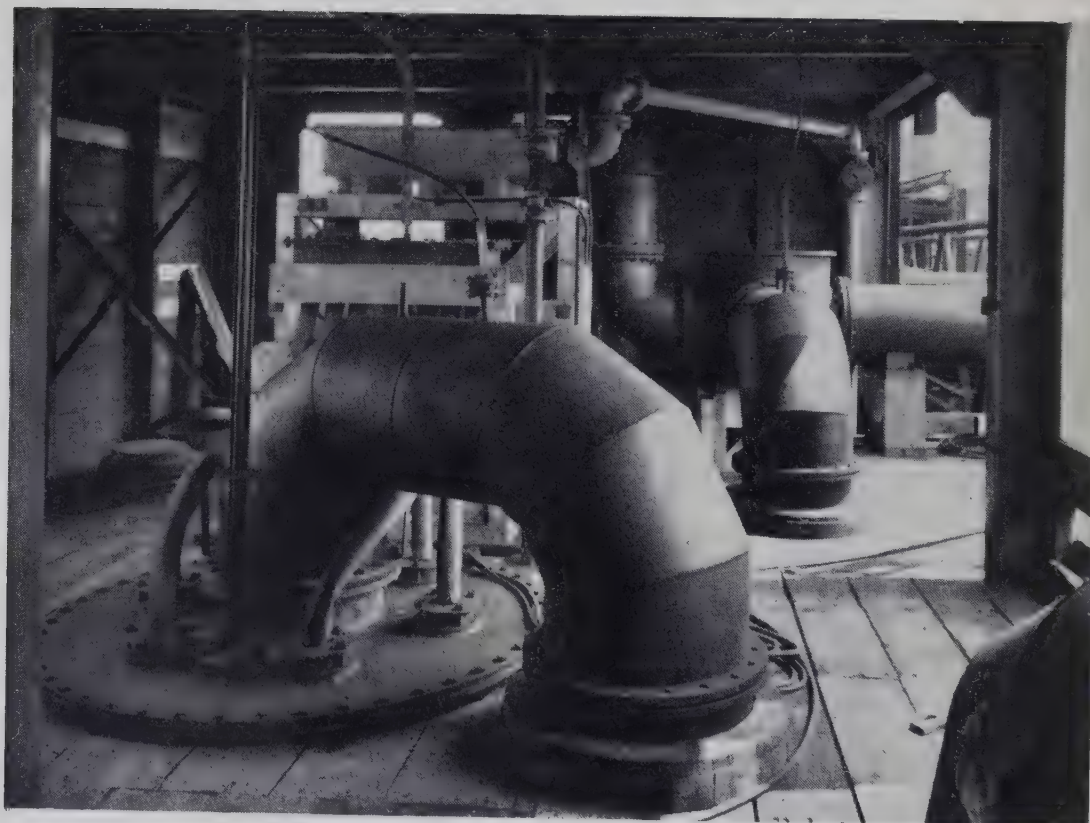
Welded tee-piece of 36 in. diameter pipe for drain manhole
